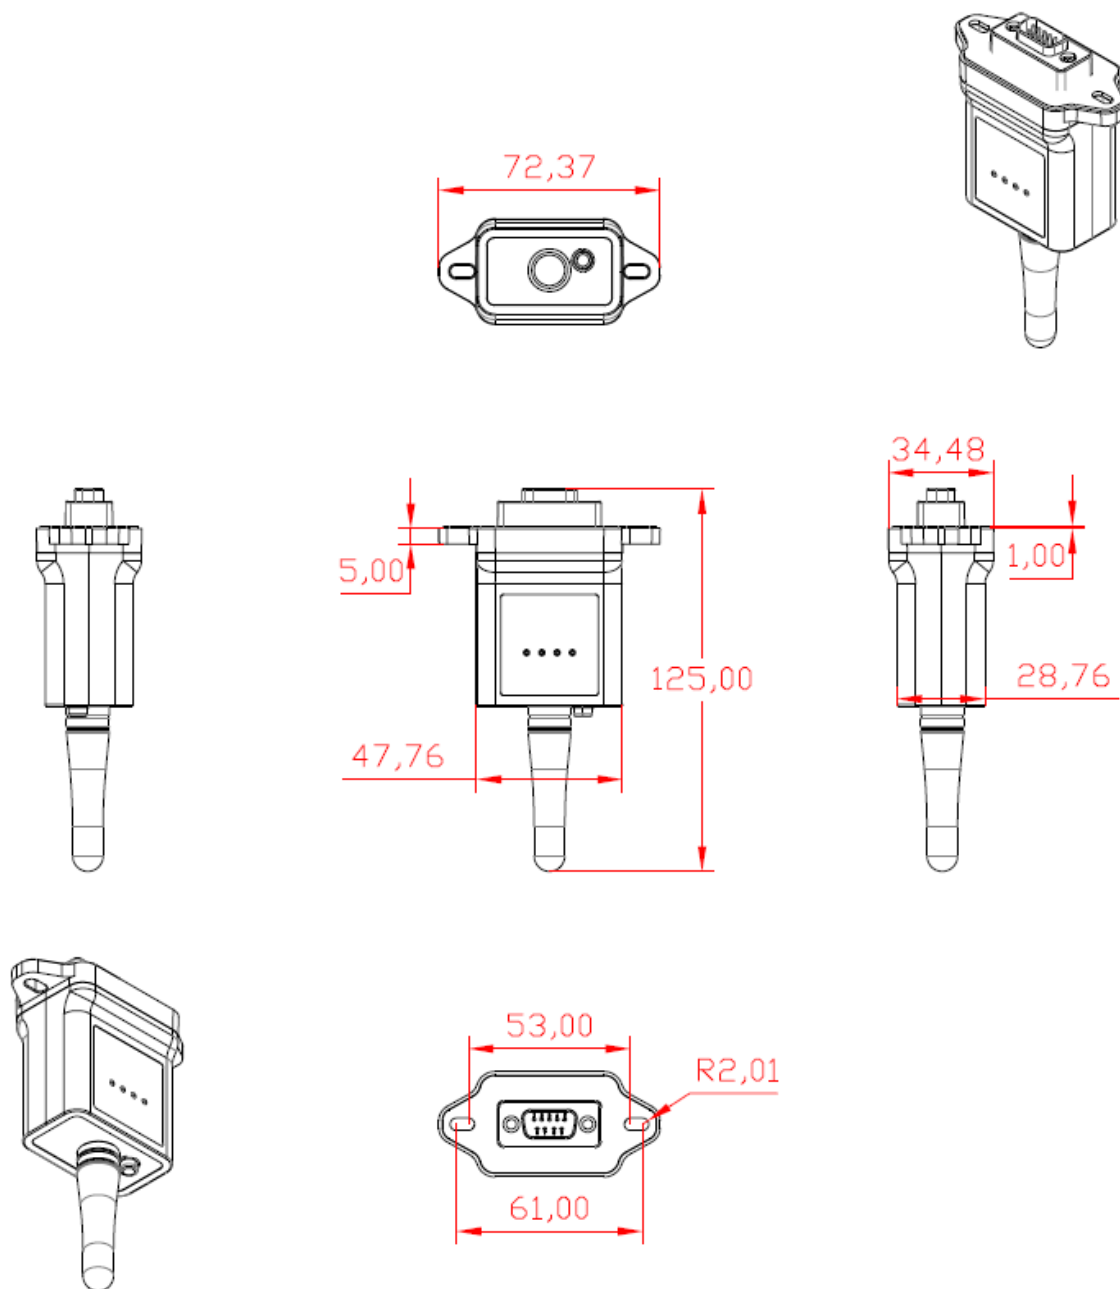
Solar Plug-SWB1-06/-15/-22 Mechanical Dimensions
